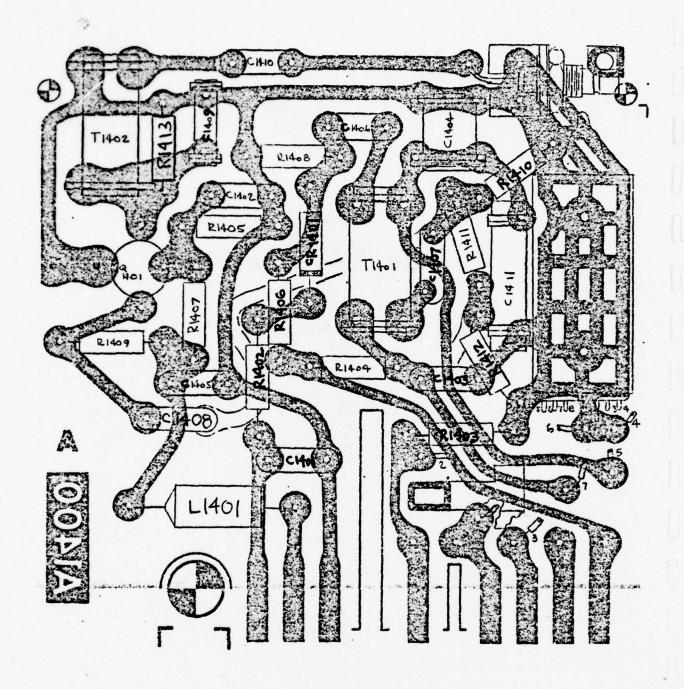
P.C. BOARD LAYOUT FOR THE A1400A RECEIVER MIXER AND BUFFER AMPLIFIER ASSEMBLY
